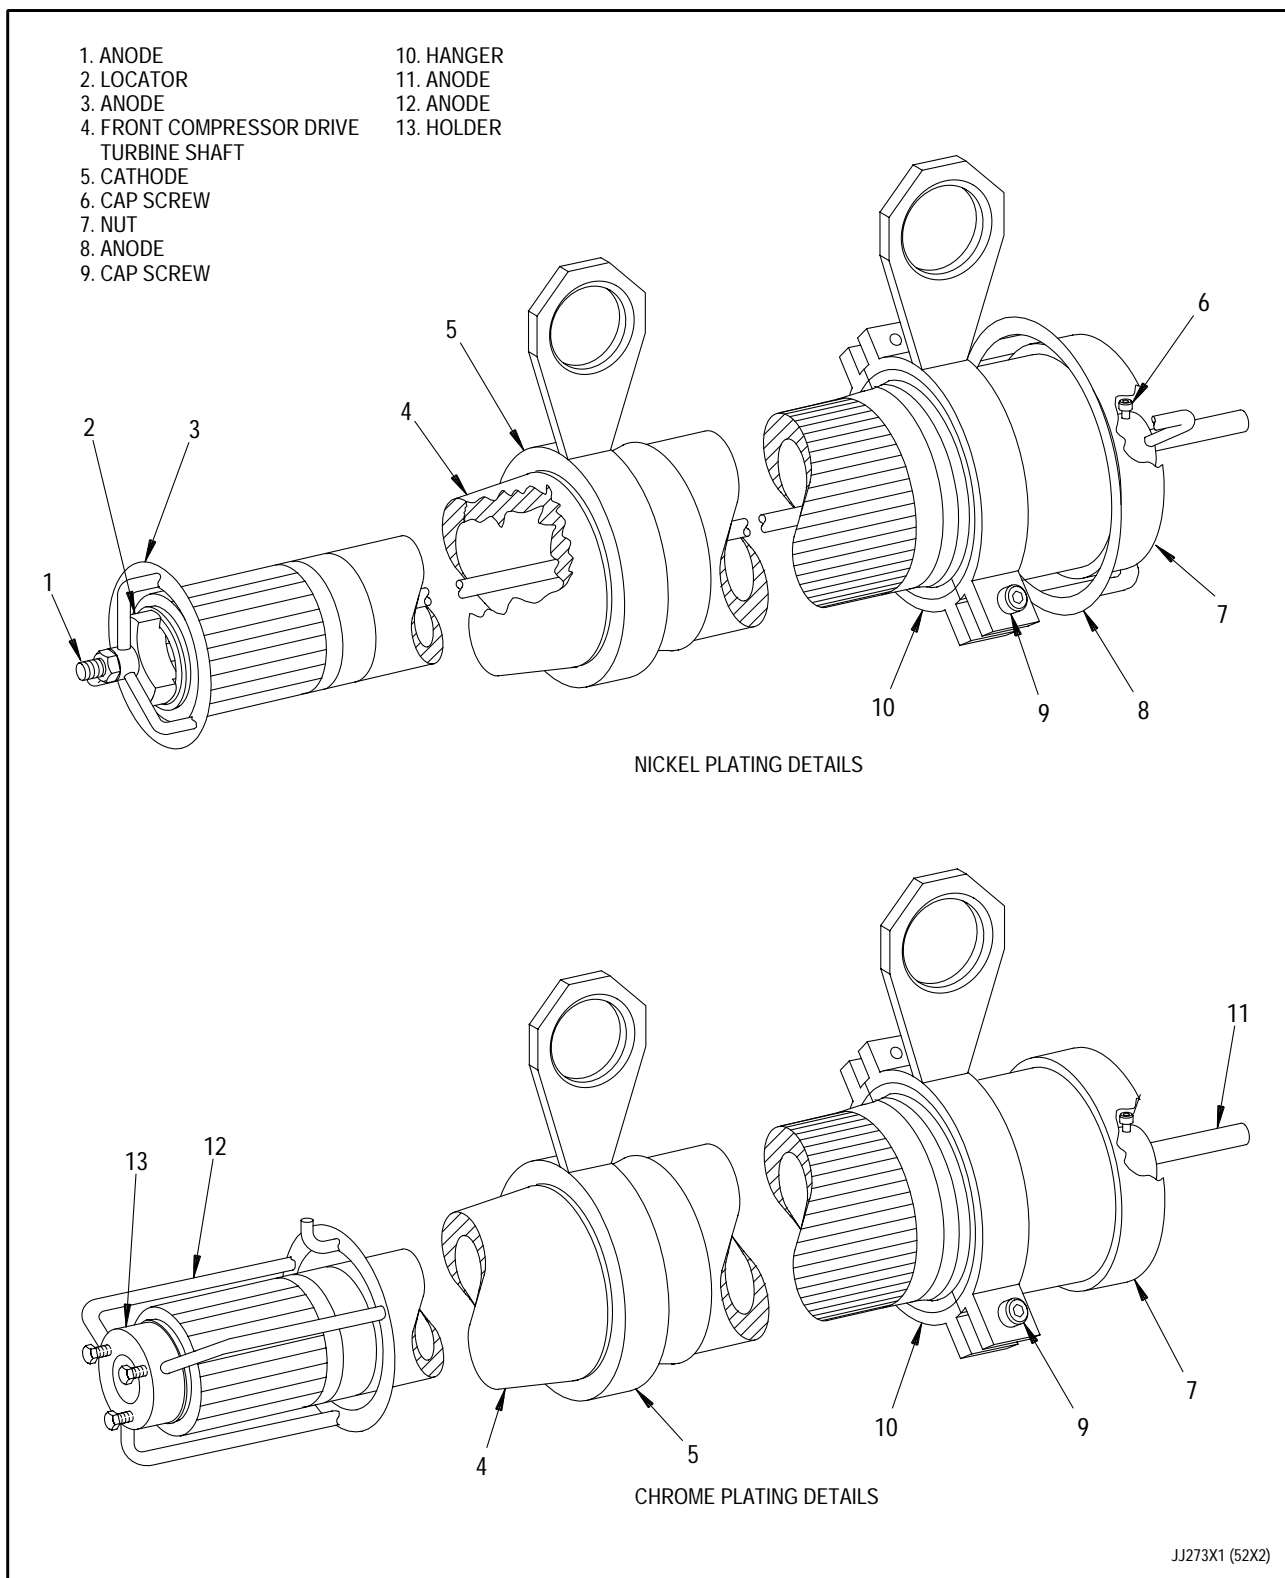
Front Compressor Drive Turbine Shaft - PWA 52941 Plating Fixture Installation
